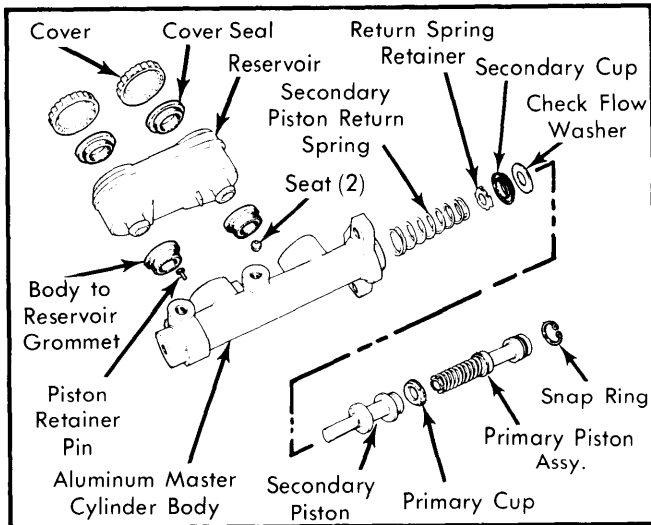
Chrysler Corp. Aluminum Body Master Cylinder
